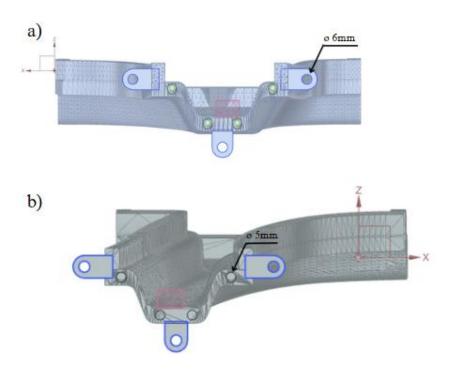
Exploded view of the mold in Siemens NX, showing the joining system:: (a) Part A, (b) Part B.
